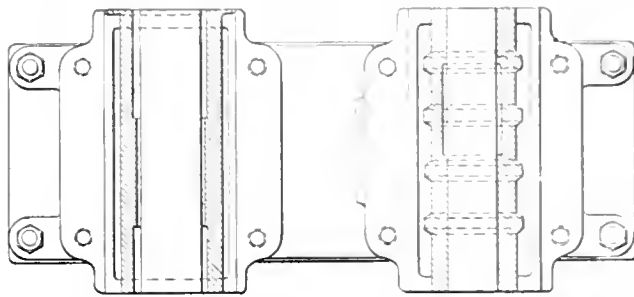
Plan of Thrust Bearing showing Thrust Grooves cut by the Bar
